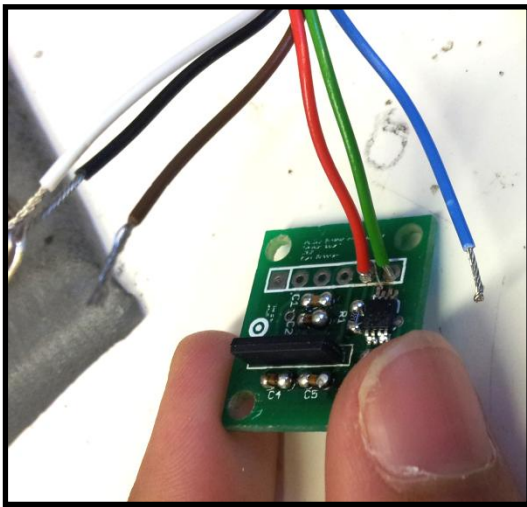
Wire being soldered onto the sensor board, after all the smaller components have been soldered.
